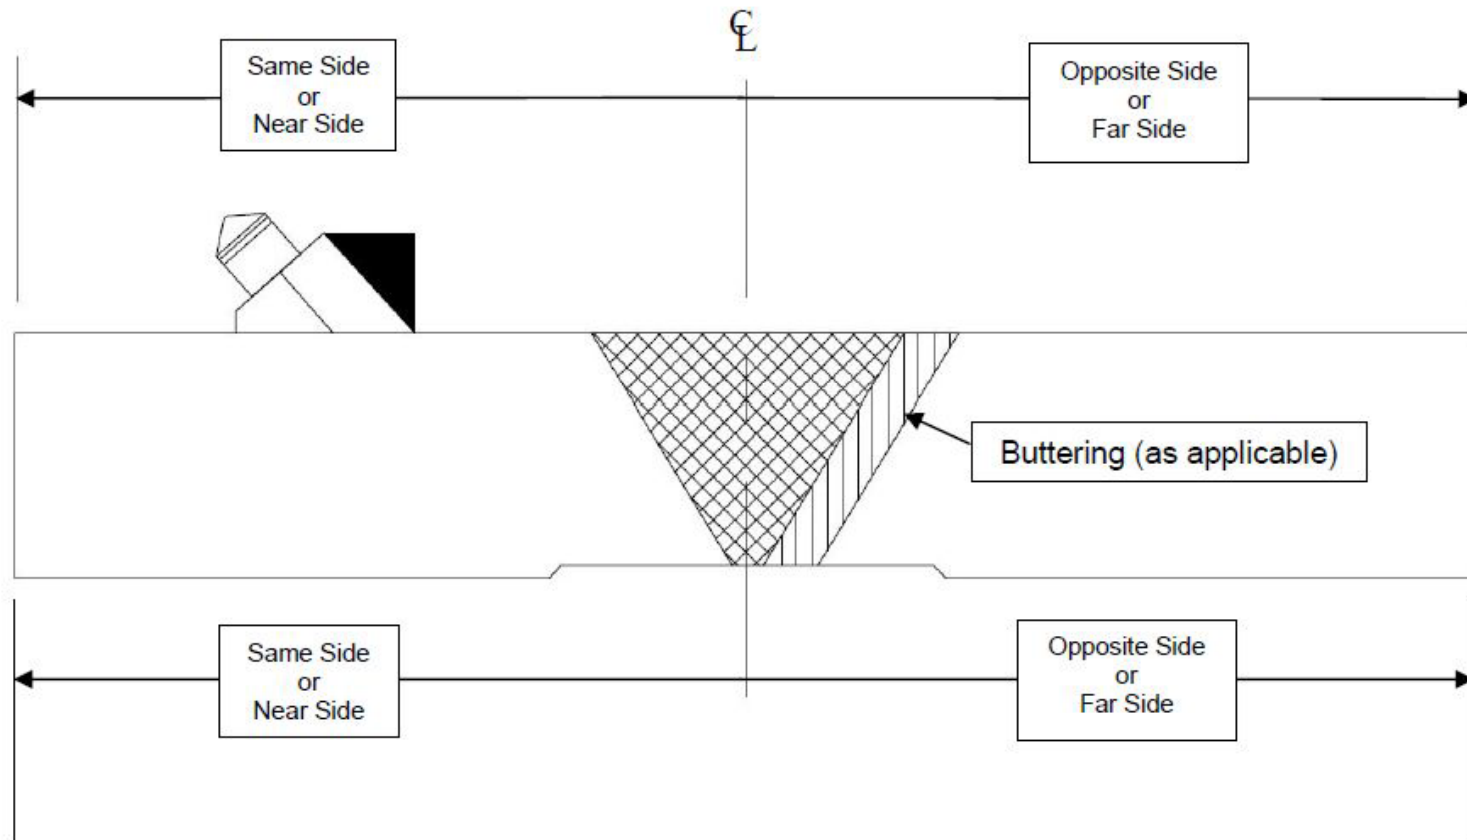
Ferritic, Austenitic or Dissimilar Metal Weld
